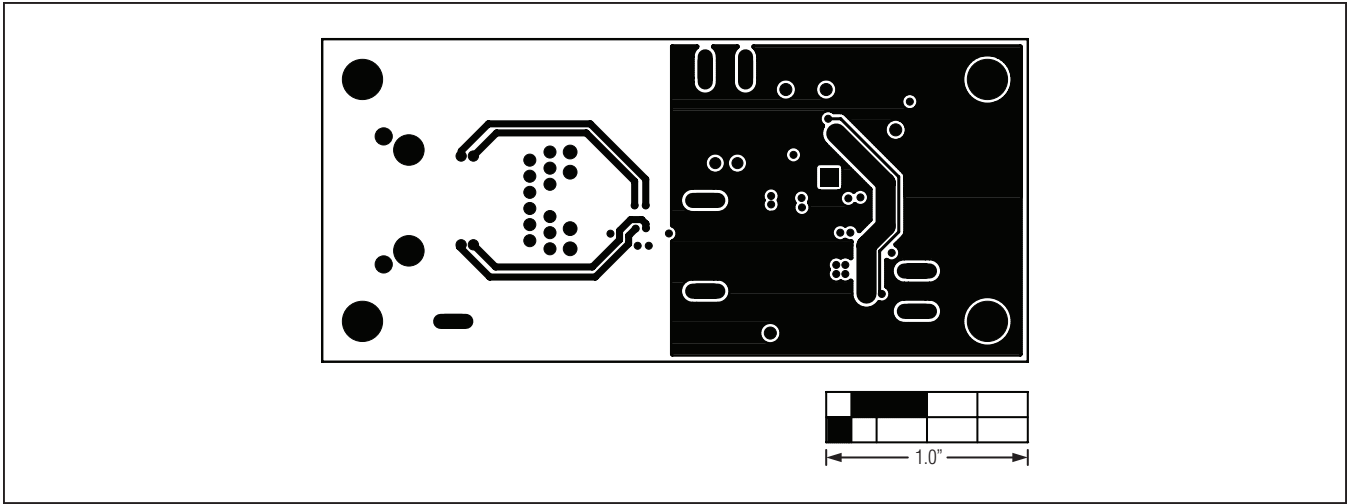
MAX5986A EV Kit PCB Layout—VCC Layer 3
